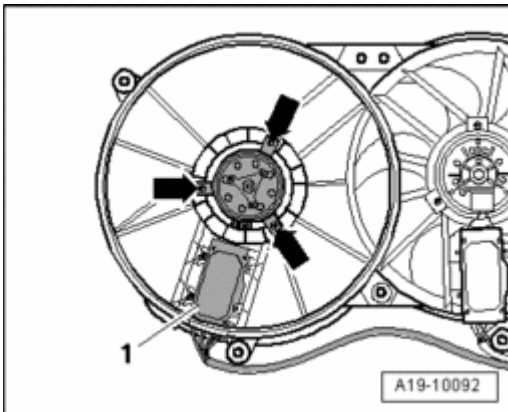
Removing Bolts, Unclipping Coolant Fan Control (FC) Control Module J293 And Removing Coolant Fan And Coolant Fan Control Module
